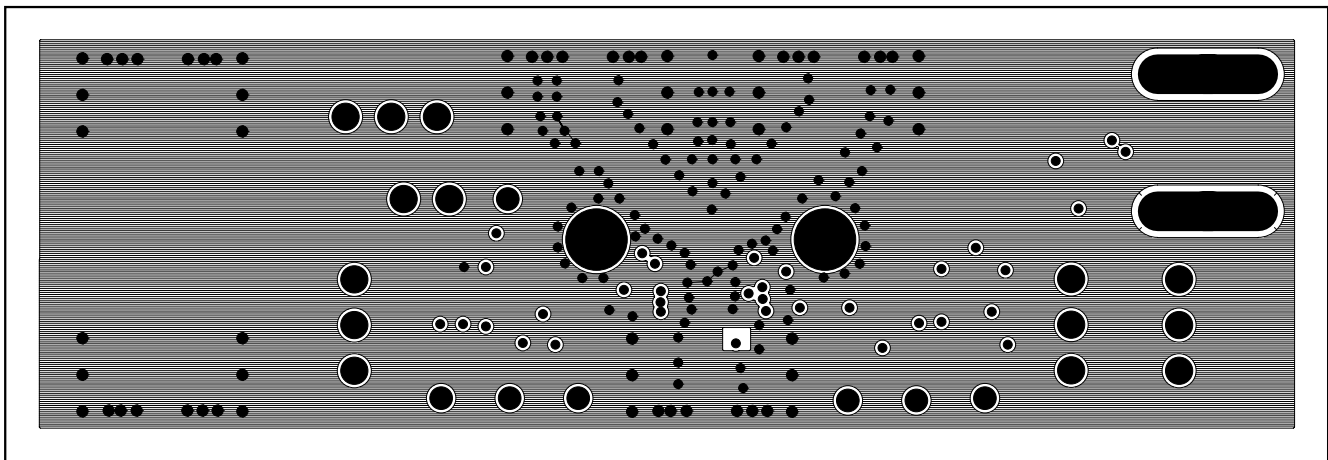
MAX3934 EV Kit PC Board Layout—Ground Plane
